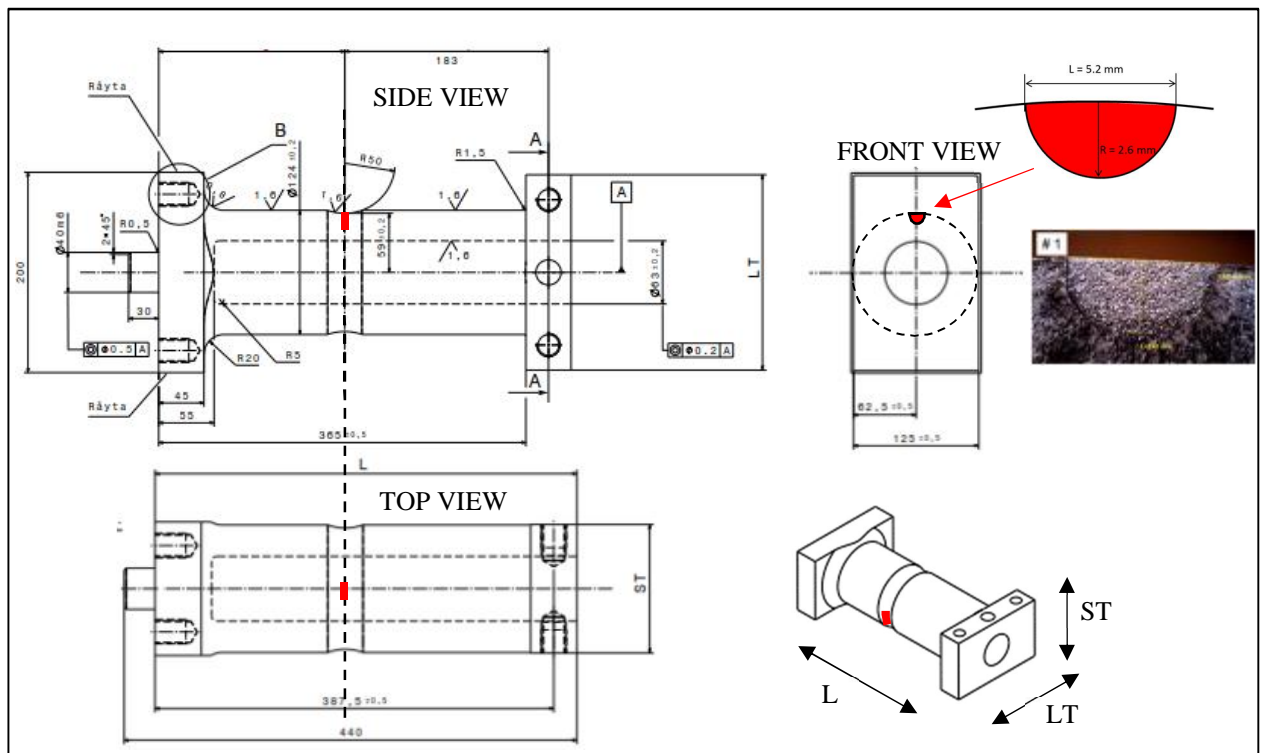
Test specimen geometry and position of the artificial crack
